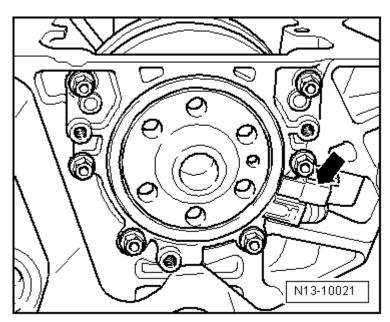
Identifying Engine Speed (RPM) Sensor G28
